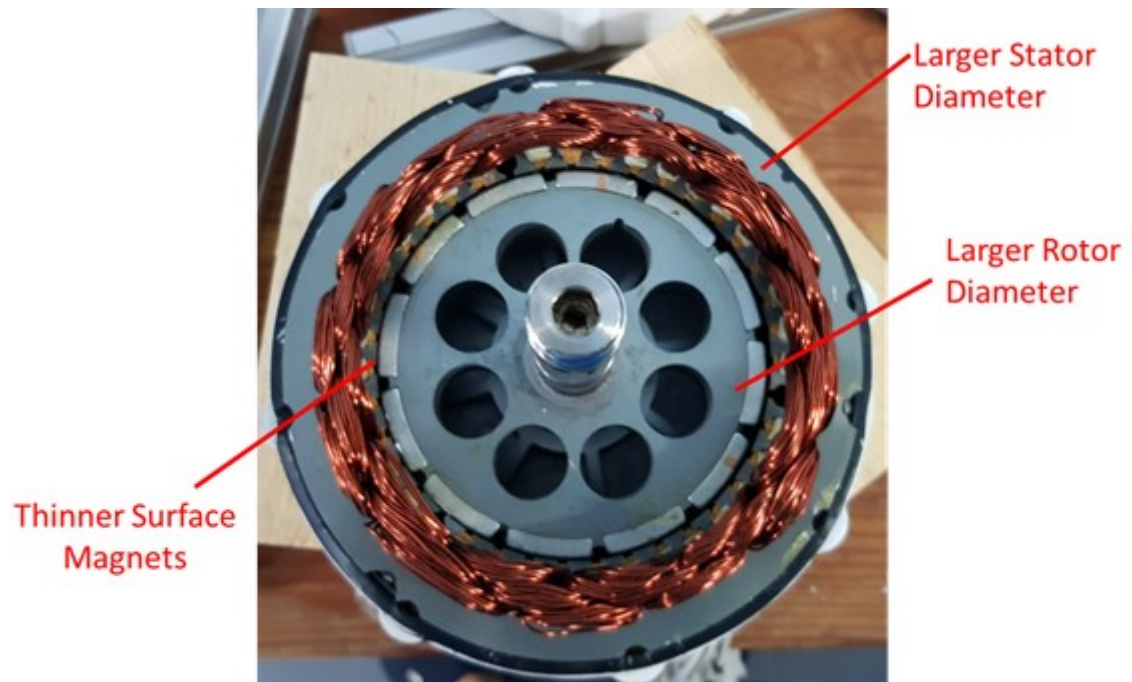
SM-PMSM machine with larger diameter rotor construction.
